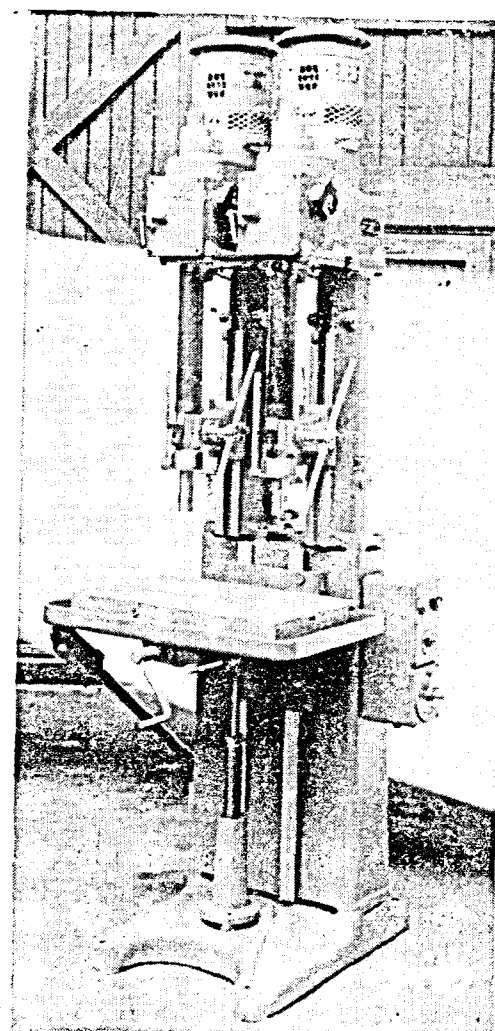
Herbert type C all-electric two-spindle drilling machine.
